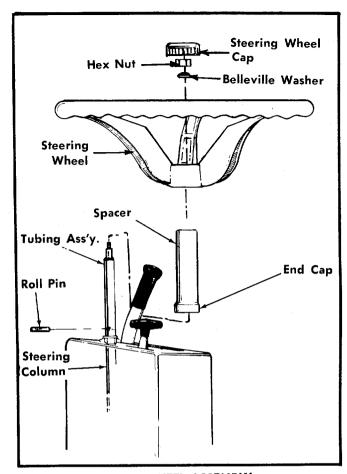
STEERING WHEEL ASSEMBLY SEAT ASSEMBLY. See figures 2 and 3.
